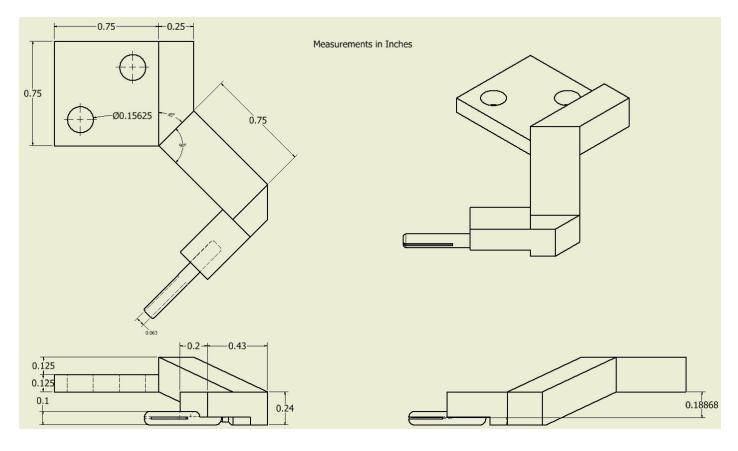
Dimensioned drawing of the left arm of the device. This was combined with the handle and right arm to create the final prototype device. It consists of a 0.75" x 0.75" base that is inserted into the handle as well as an extended arm portion that is used to position the blade the correct depth below the handle. The right arm is a mirrored version of the left arm, with the 0.75" x 0.75" on the upper half of the arm, rather than the lower half.
